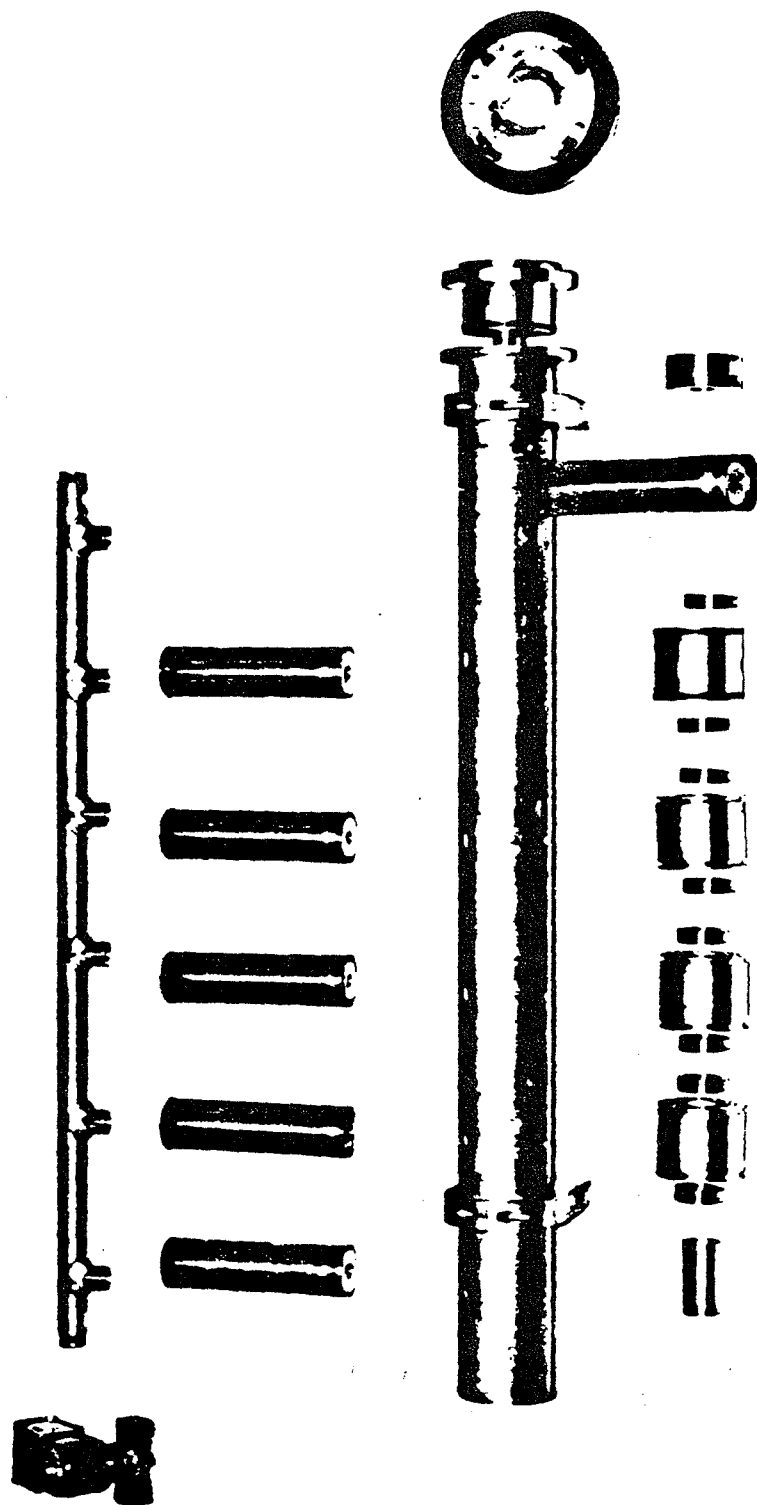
Rotary Valve Injection Apparatus, Disassembled
